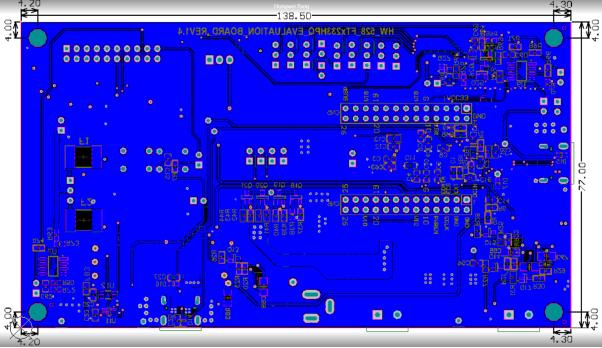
UMFT4233HPEV Evaluation Board - Mechanical Diagram - Bottom View
